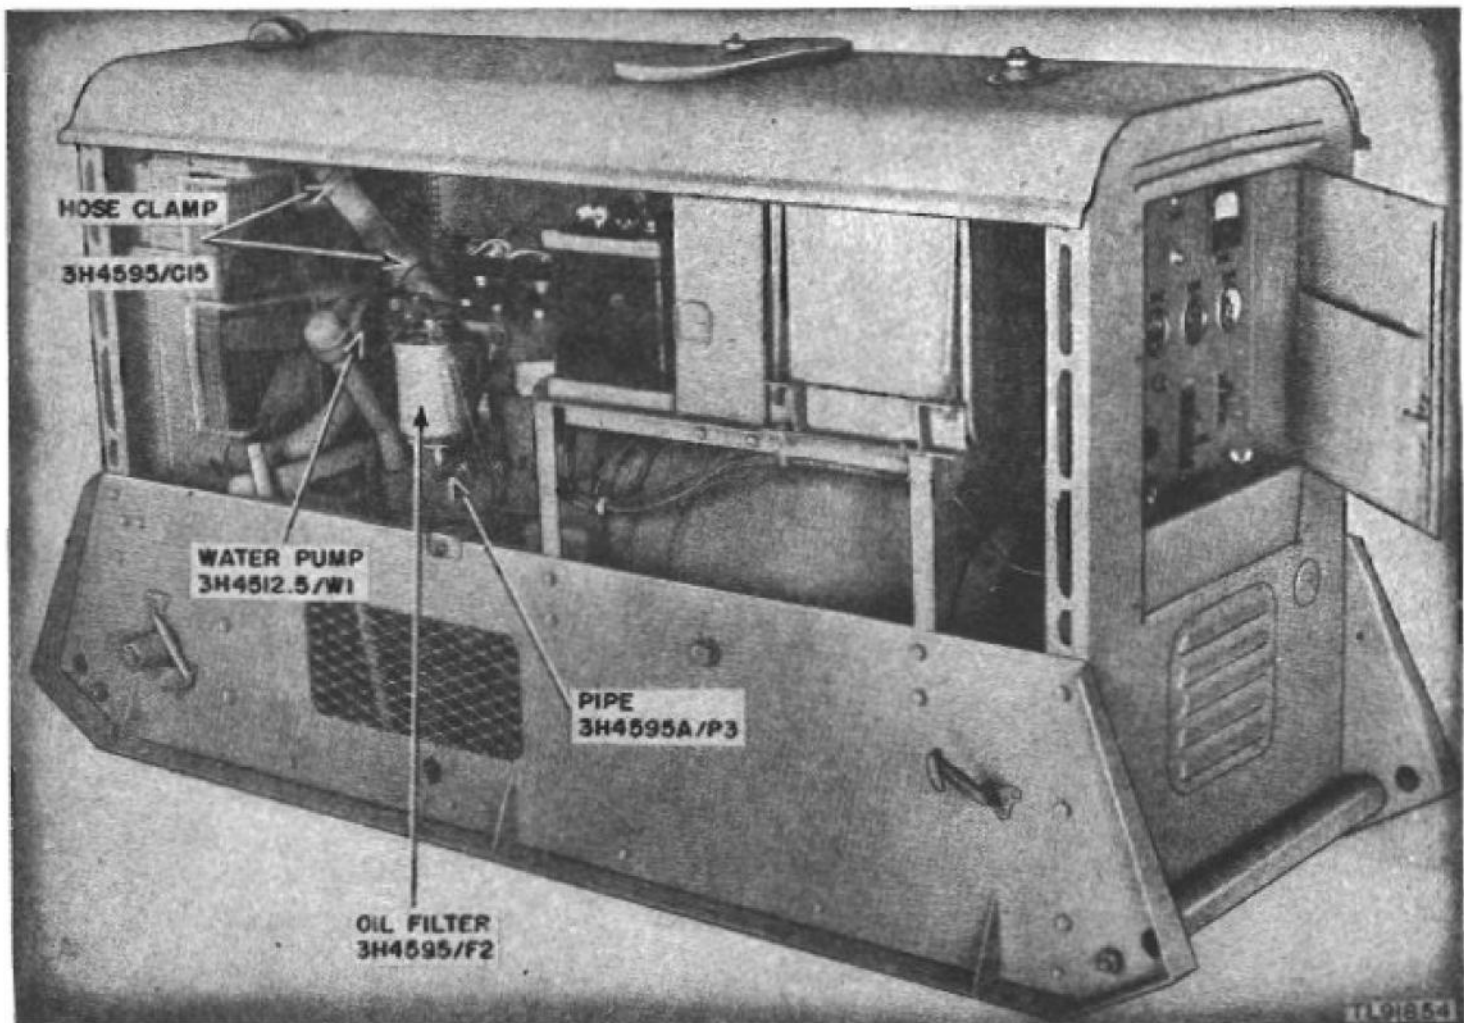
Power Unit PE-95-(1), right side, panels removed.
